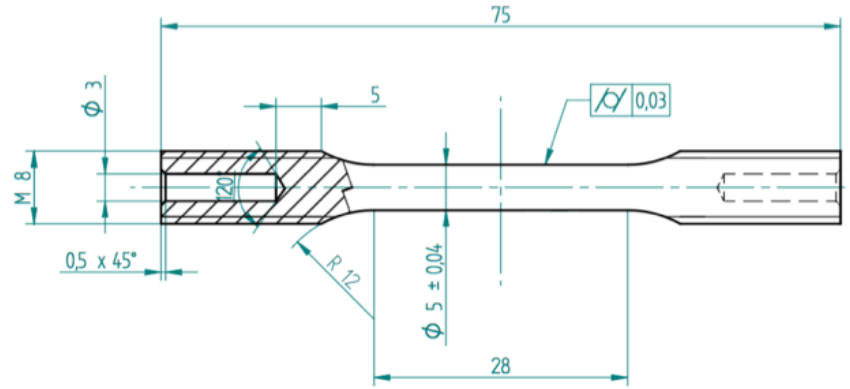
Geometry and dimensions [mm] of tensile specimens
